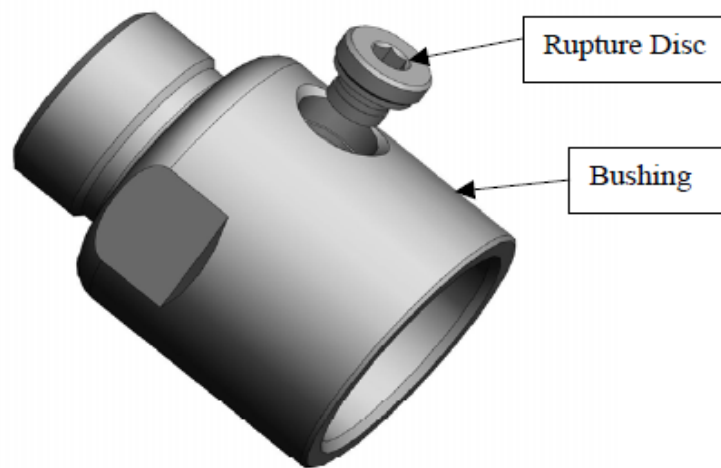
A sketch and explanation of a typical downhole tubing drain that should be considered if a pump normally sticks or the pulling forces are high due to well conditions to prevent the need to pull a wet tubing string.
